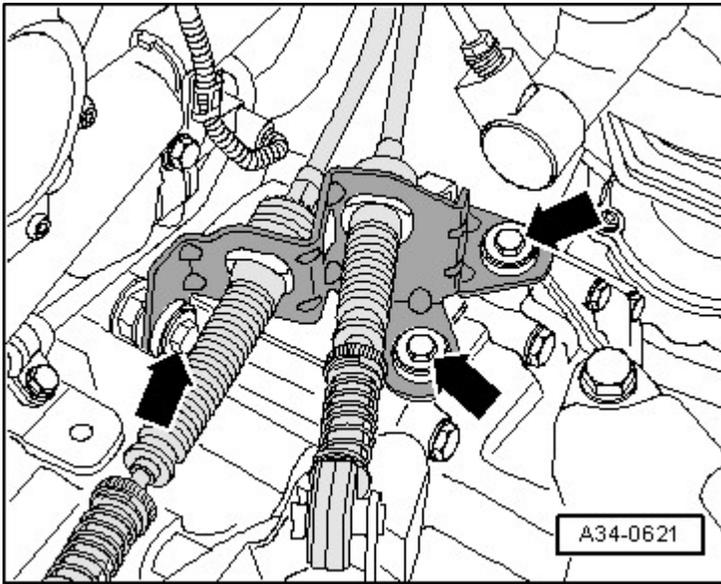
Identifying Cable Mounting Bracket From Transmission
